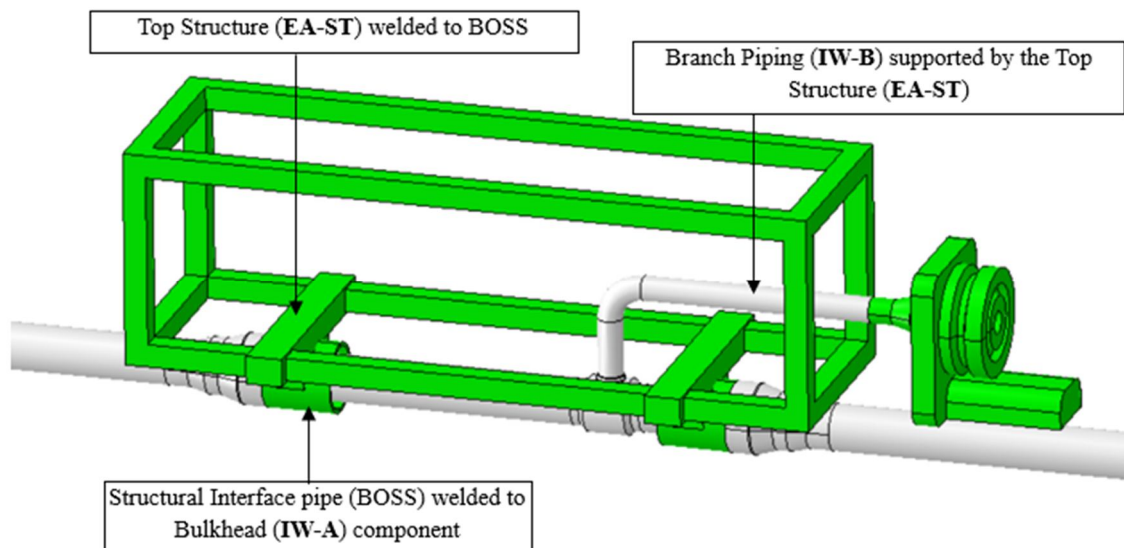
Example - Rigid Connection of Top Structure to Bulkheads via BOSS elements
